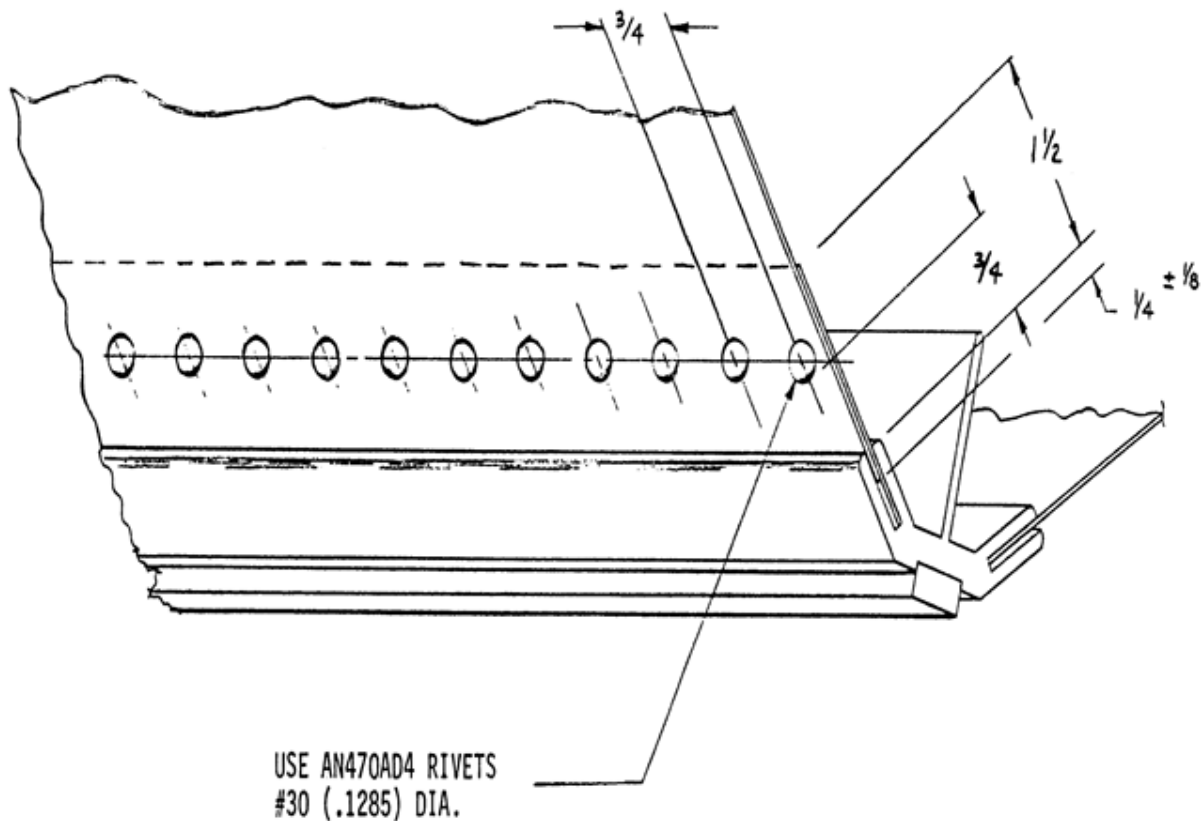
C: MODEL 3730/3900/4000/6000/6100/8000 TYPICAL REPAIR BOTTOM SKIN TO KEEL (ALT) INSTRUCTIONS (ALTERNATE METHOD)
